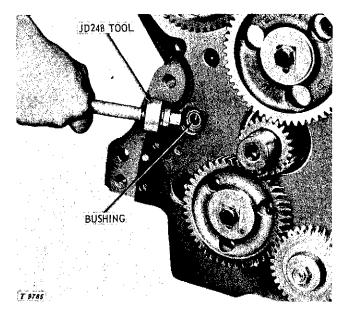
Pressing in Oil Pressure Regulating Valve Bushing
